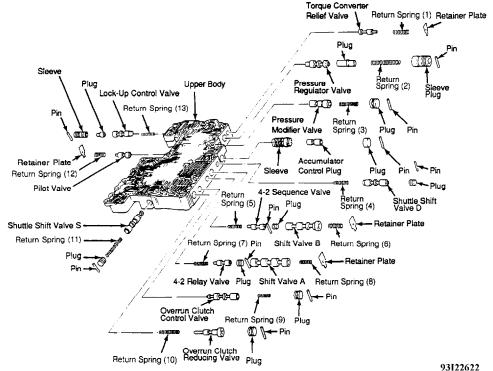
Control Valve Upper Body (RE4R01A & RE4R03A) Courtesy of Nissan Motor Co., U.S.A.
